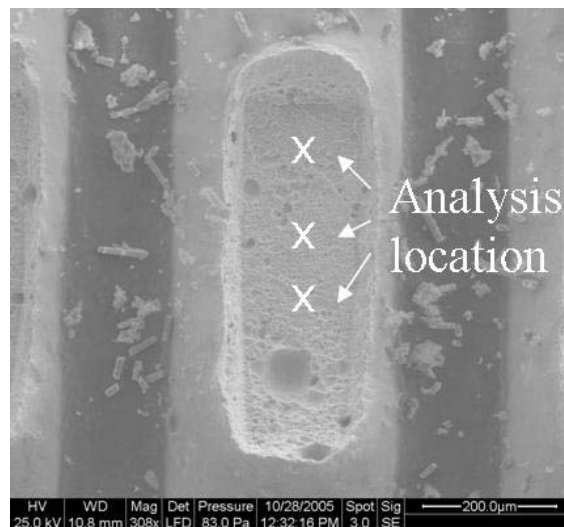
Fracture surface on pad side for QFP (Sn) - Sn3.0Ag0.5Cu solder - ENIG pad finish sample, Aged at 125C for 350 hours where the elemental analysis was conducted
